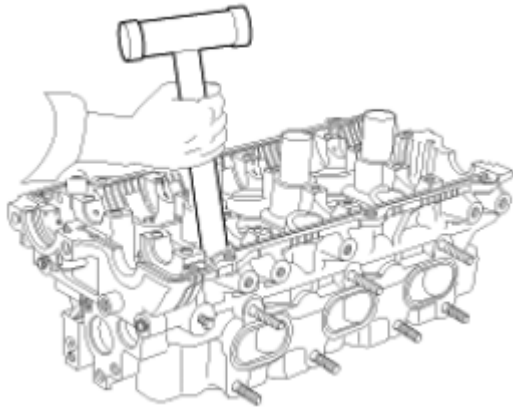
Checking Proper Seating Of Valve And Retainer Lock
